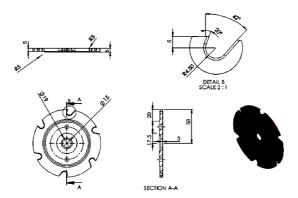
CAD views of seed metering device with all dimensions (mm)
